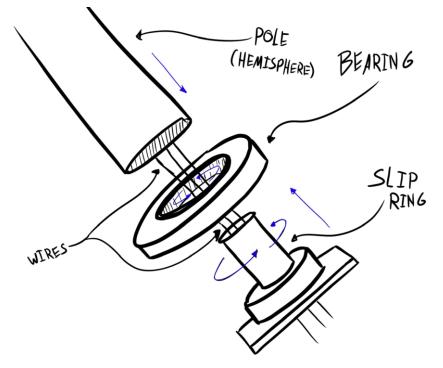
THE MECHANISM FOR ROTATING DRAWN OUT
